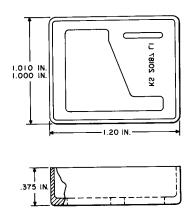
KS-20187, L1, Terminal Insulator Tool
